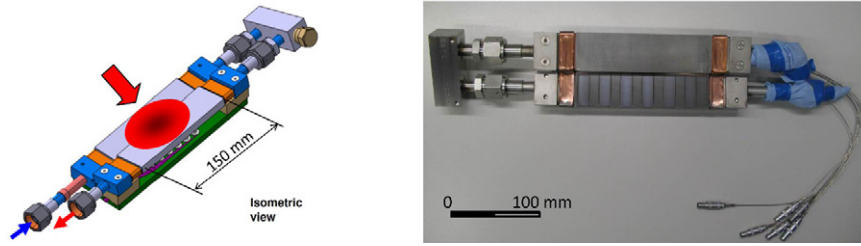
Prototypes for thermo-mechanical tests of Mo coated Cu samples.
